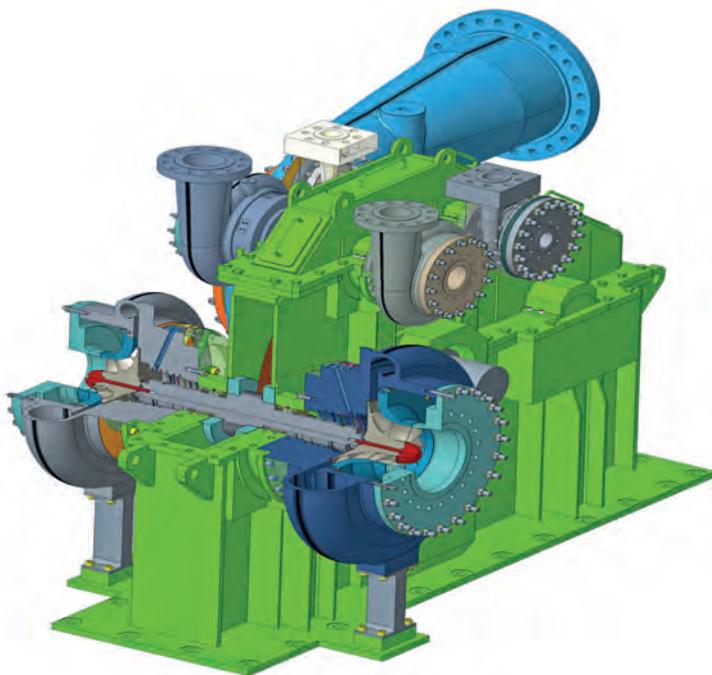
Integrally geared centrifugal compressor without the intercooler shown.
